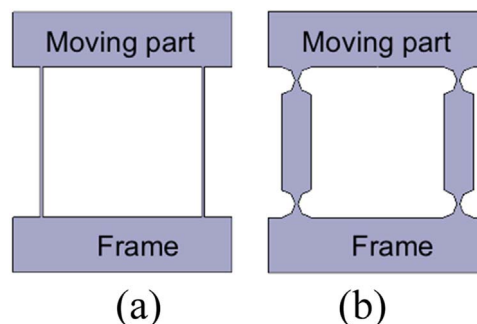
Flexure joints (a) leaf-spring type (b) notch type.
